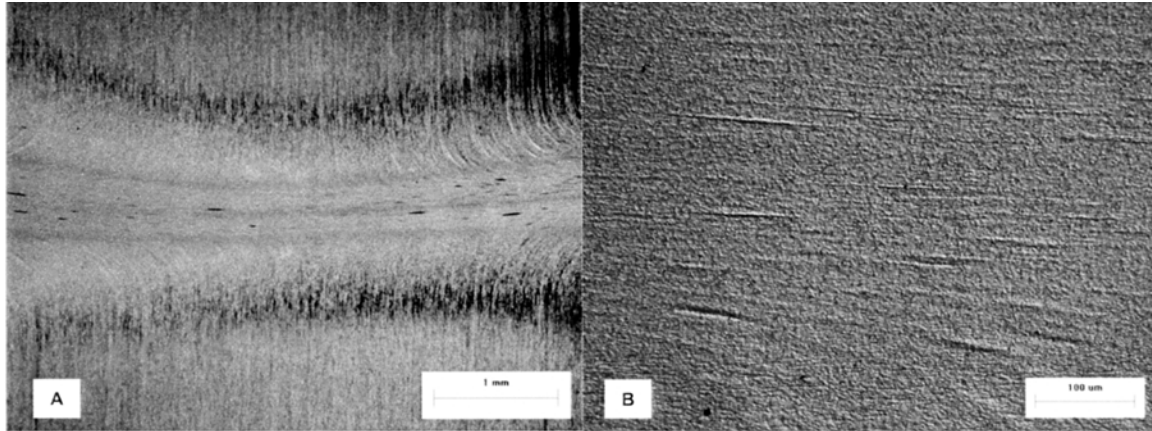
Cross section of a weld produced in fine-grained MA956 by high thrust-load inertia friction welding, showing (a) the macro appearance of the joint, and (b) the fine alloy grain size in the joint.³⁰
